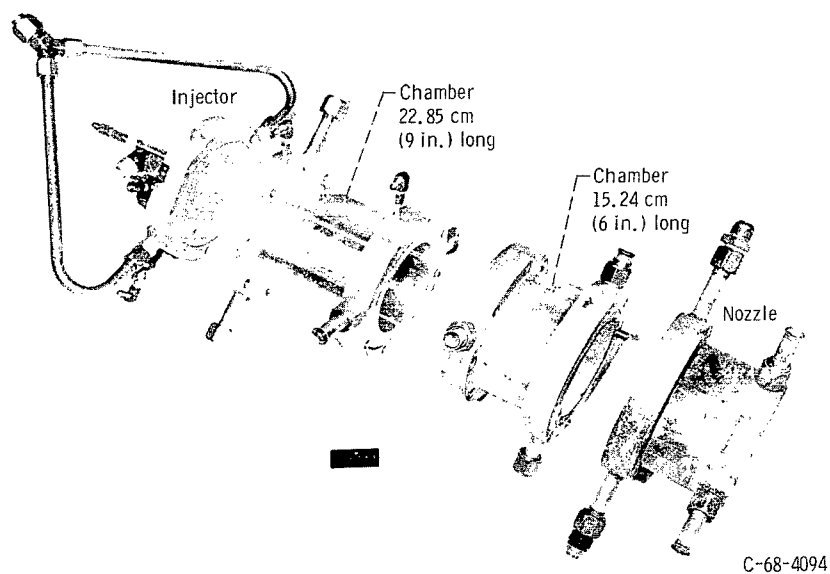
Thrust chamber assembly; water-cooled chamber and nozzle.
